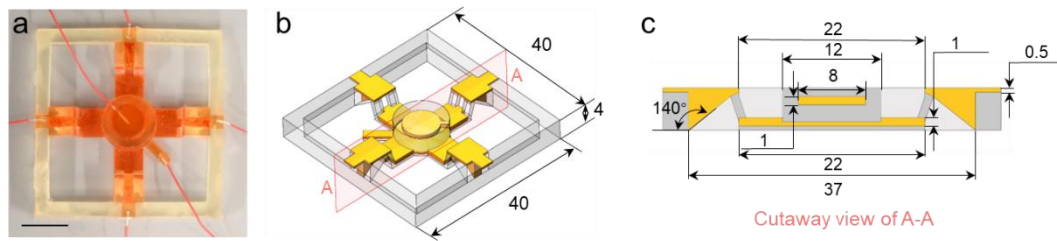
Remote-control sensor. (a) Photograph of the remote-control sensor with copper wires connected. Scale bar: 10 mm. (b) Schematic of the remote-control sensor with relevant dimensions indicated. (c) Schematic of the cutaway view with relevant dimensions indicated. The unit is mm.
